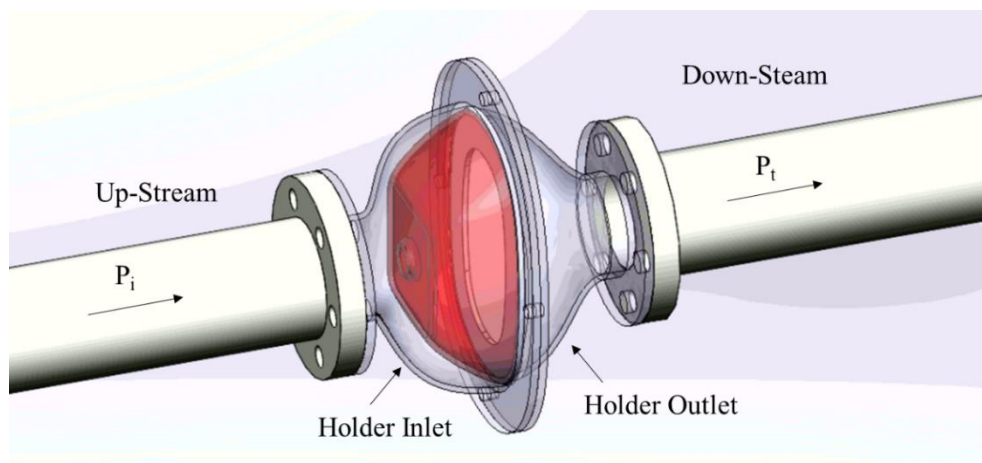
Earcup Holder Assembly with Impedance Tube.
